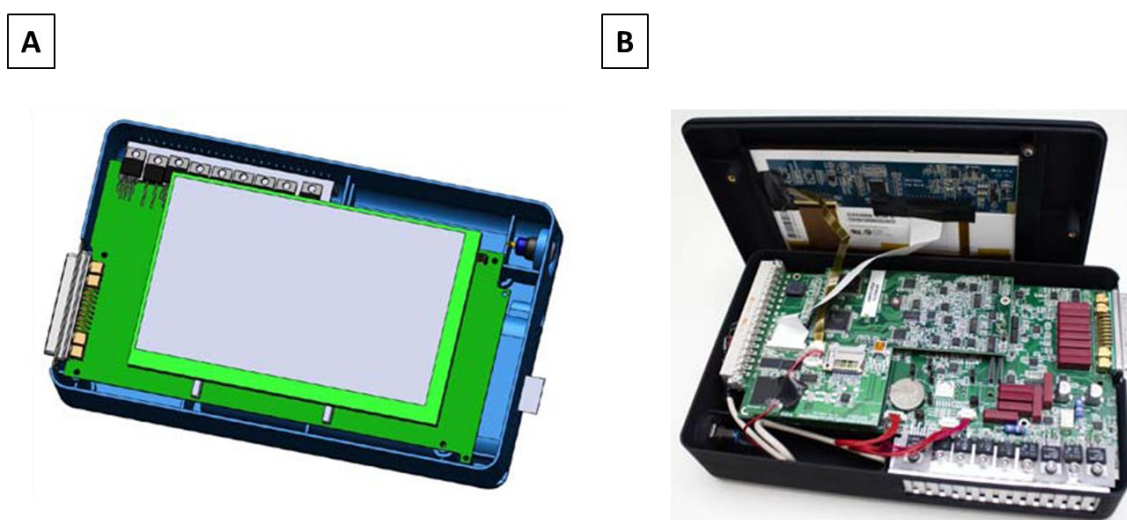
Instrument 3D CAD design (A) and assembled prototype (B).
